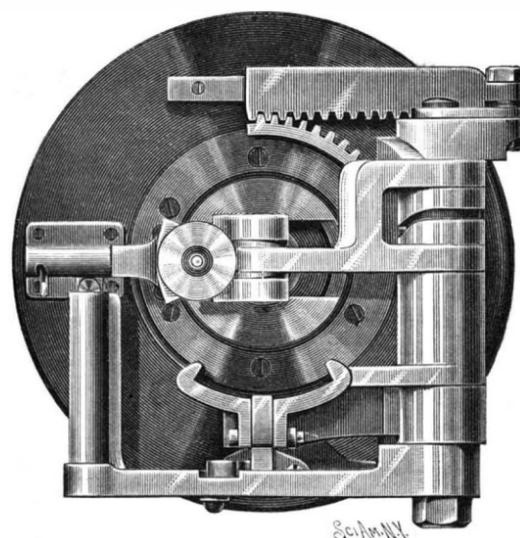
MODIFIED MECHANISM—REAR VIEW OF BREECH CLOSED.
